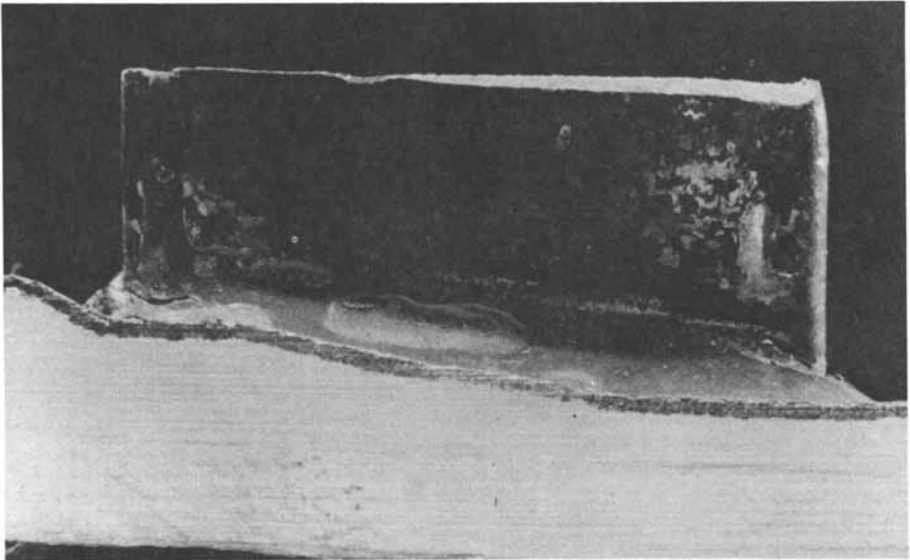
Top of individual tube, closed-system radiator section, where solder failure caused leakage
